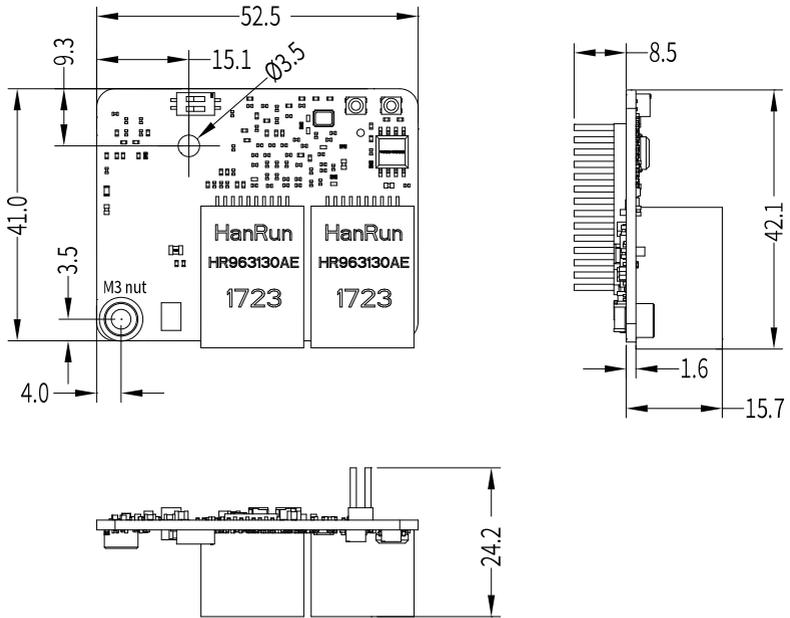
Dimensions of MD500-EM1 card (unit:mm)
